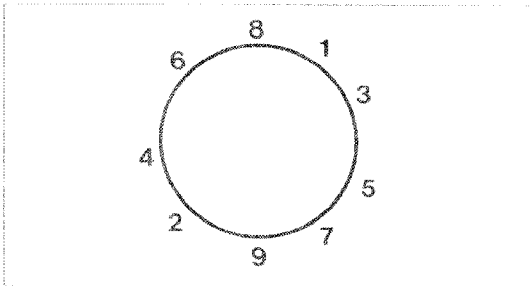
Flywheel or drive plate bolt torque sequence. Loosen and remove in reverse order.
